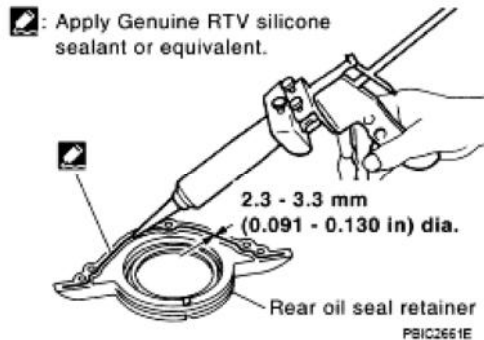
Applying Continuous Bead Of Liquid Gasket To Rear Oil Seal Retainer
